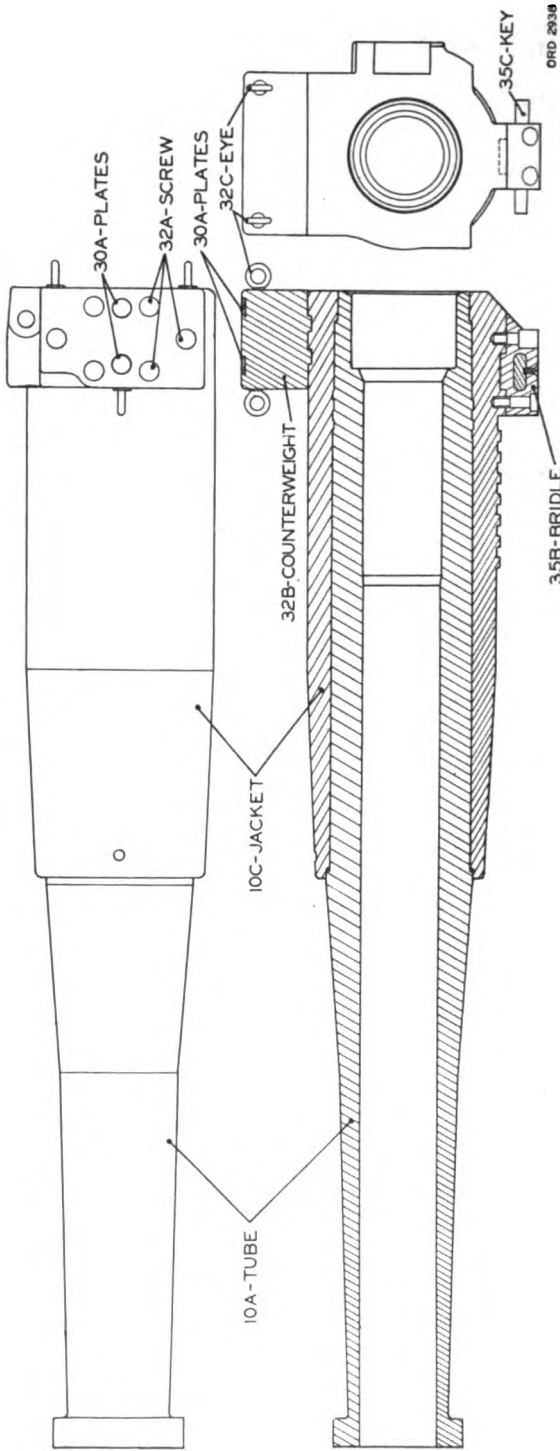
155-m. howitzer, M1918—sectioned view
